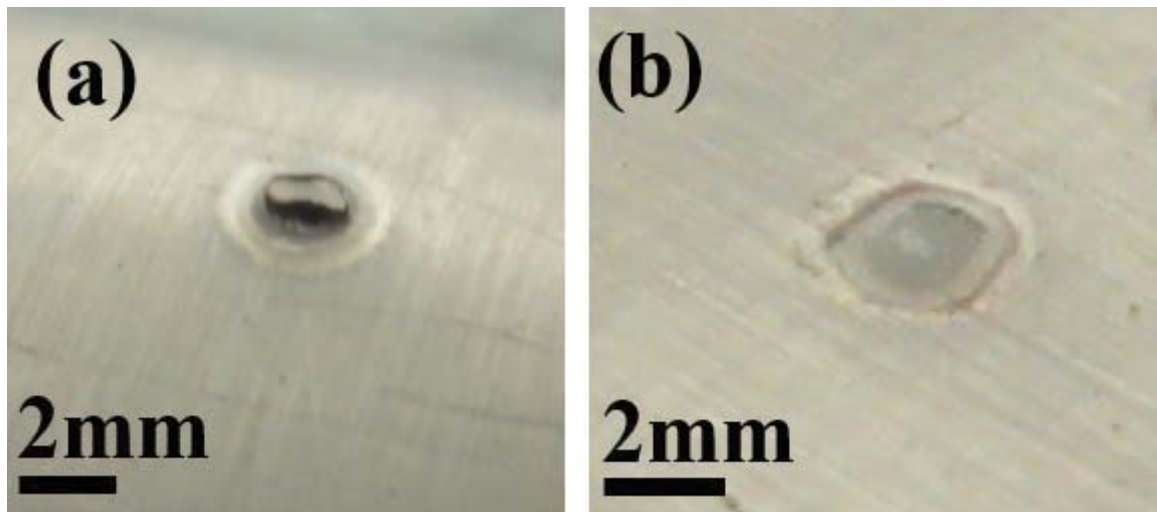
(a) Irregular Weld (from Group 5), (b) "Stuck" Weld (from Group 5)
